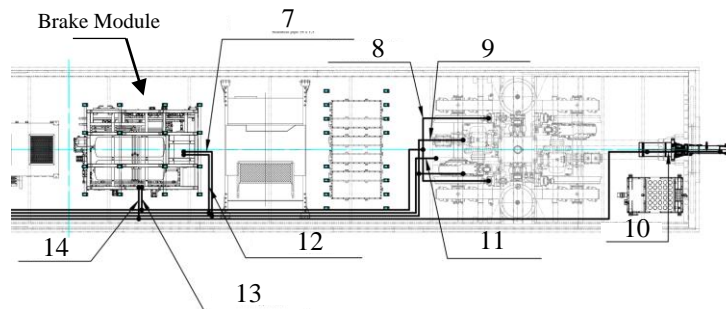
Pneumatic Piping Diagram Design on Motor Engine Combustion (top view)
